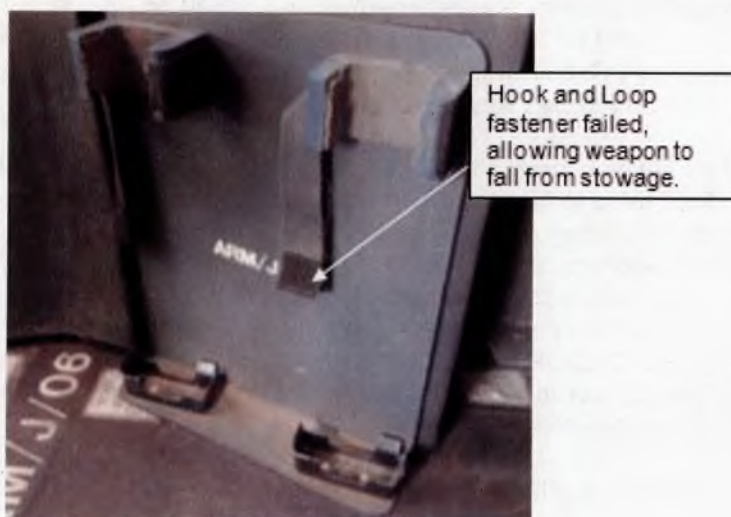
Weapon Stowage Hook and Loop retaining strap fastener failed
